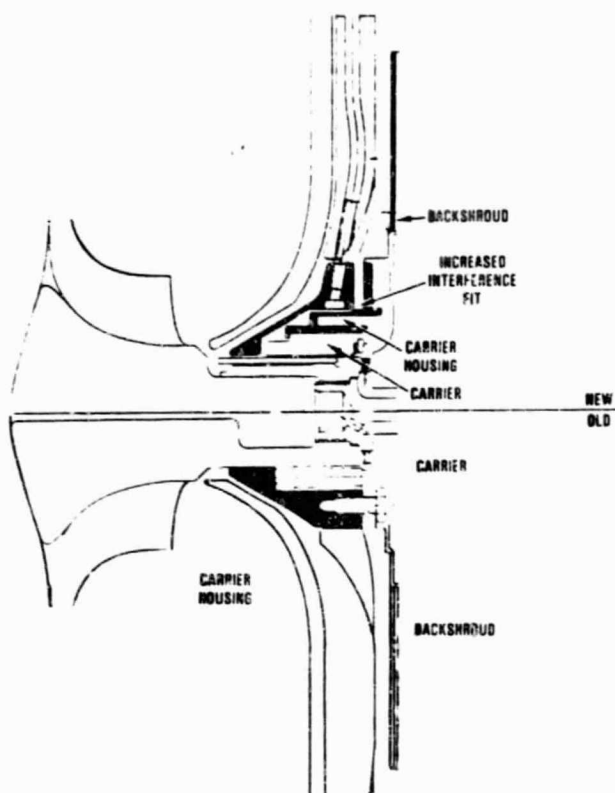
Comparison of Old and New Foil Bearing Housing Design.
